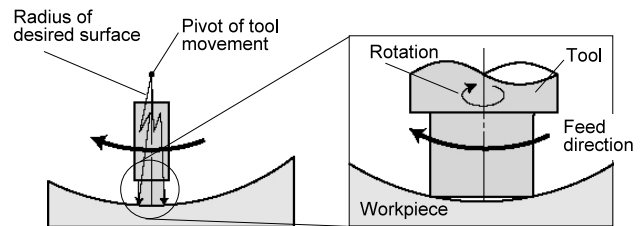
Method for feeding a cylinder type tool for machining a mirror element
